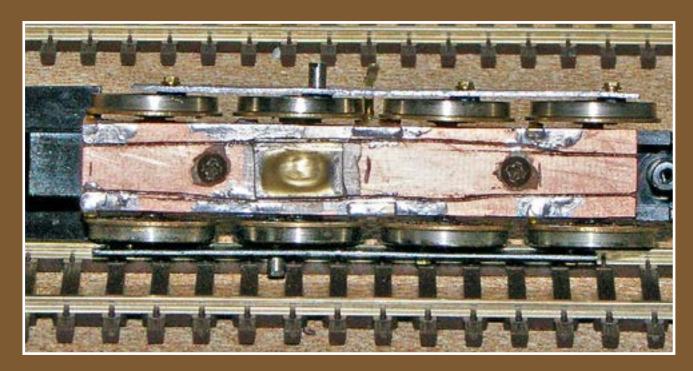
My replacement bottom plate is not pretty, but it works. I carved the gaps with a hobby knife and a file.
